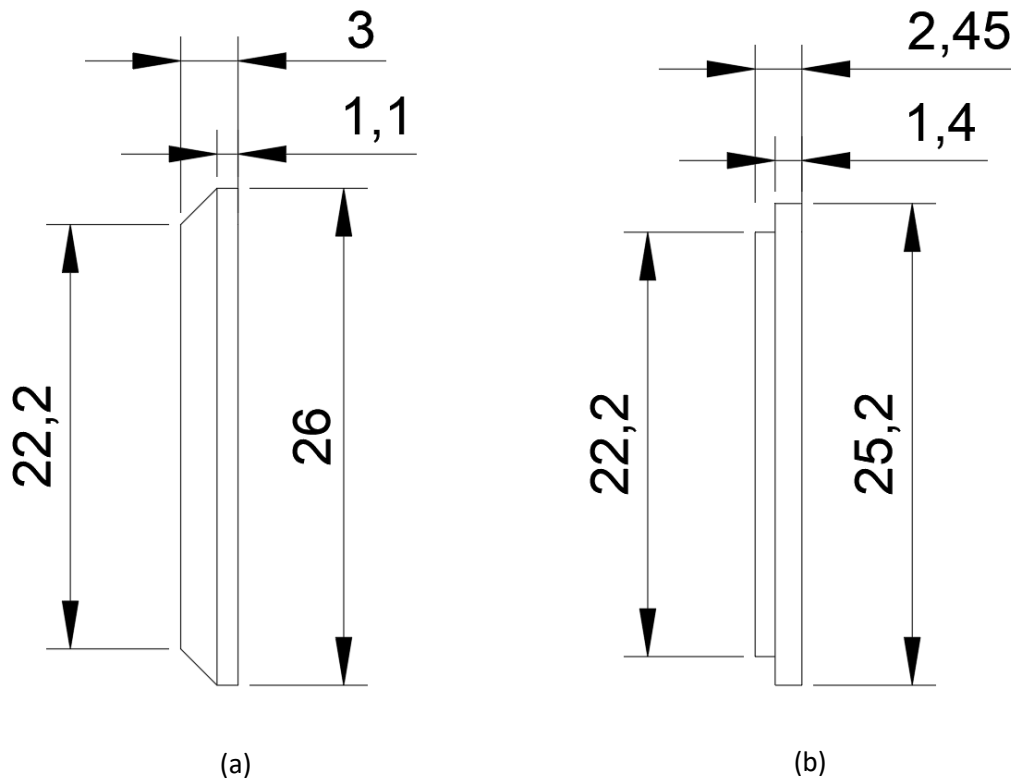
Left view of the flame diffuser, dimension in mm: (a) previous; (b) new.
